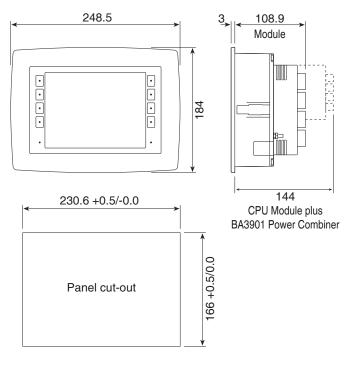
BA3101 and BA3102 dimensions including plug-in modules and panel cut-out
